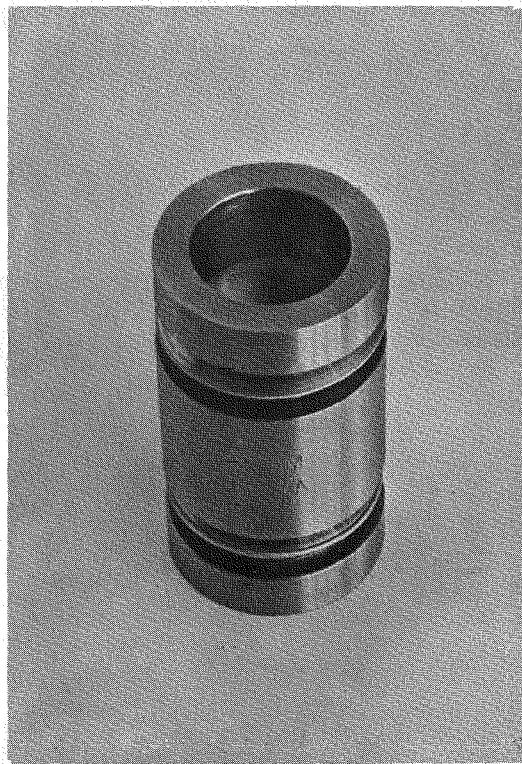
COMPLETE WELDED ASSEMBLY
